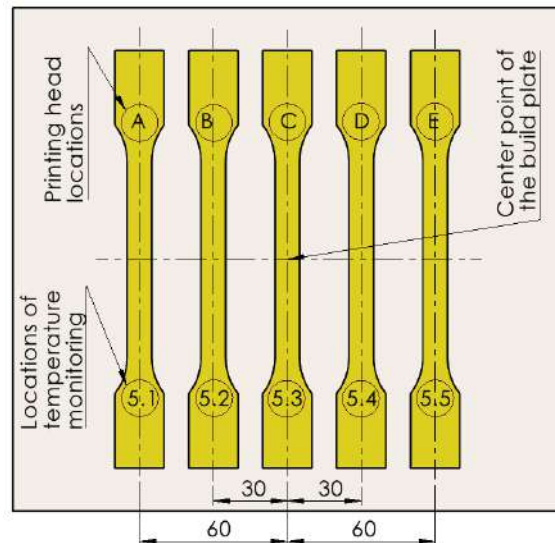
The layout for 5 tensile samples printed simultaneously.
